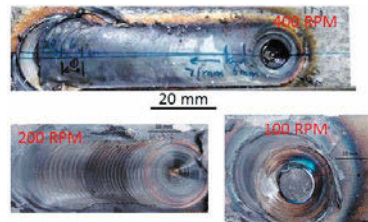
Eurofer'97 friction stir welds made with different parameters.
